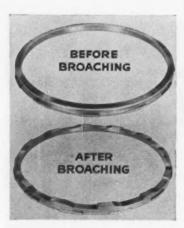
Rings before and after machining on the Colonial broaching machine shown in Fig. 1
